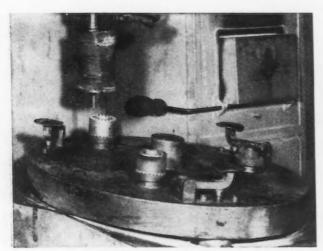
"Electronic Tornado" Welder mounted on a rotary indexing table-type fixture—hood removed.
